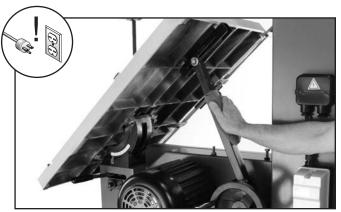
Tension adjustment assembly locations (top wheel removed for clarity).
